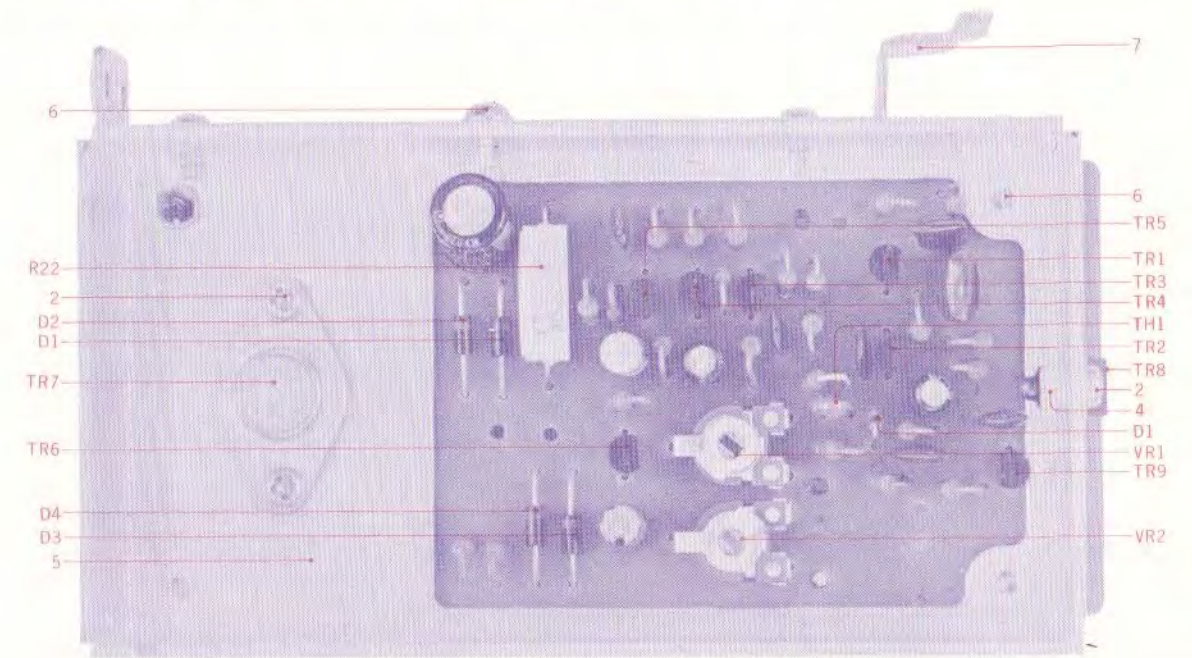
PHOTO OF SYS. CON. P.C. BOARD (KJ-1013) BLOCK
